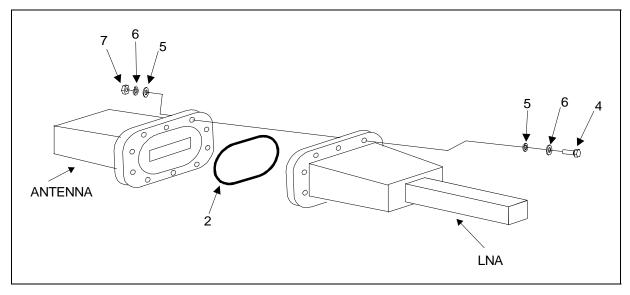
Exploded View of a Typical LNA Connector Kit
